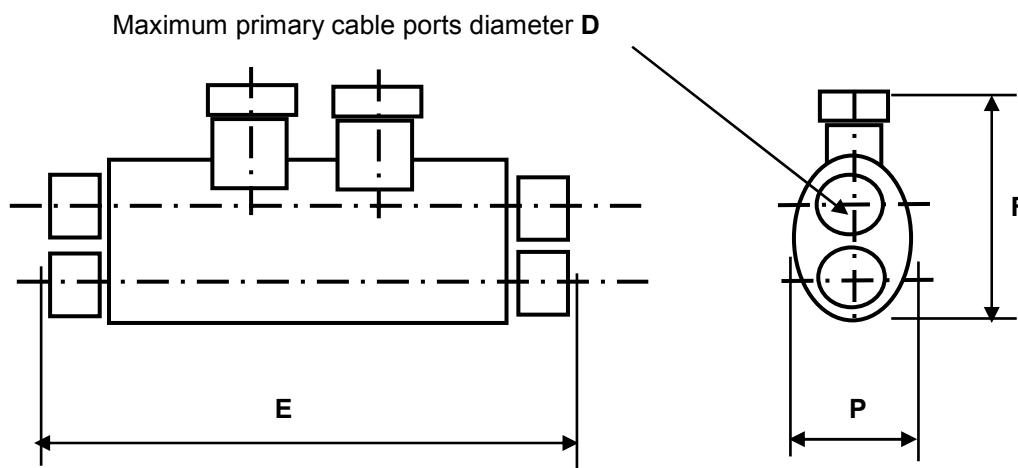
Diagram showing tee – Closures dimensions showing double ports
